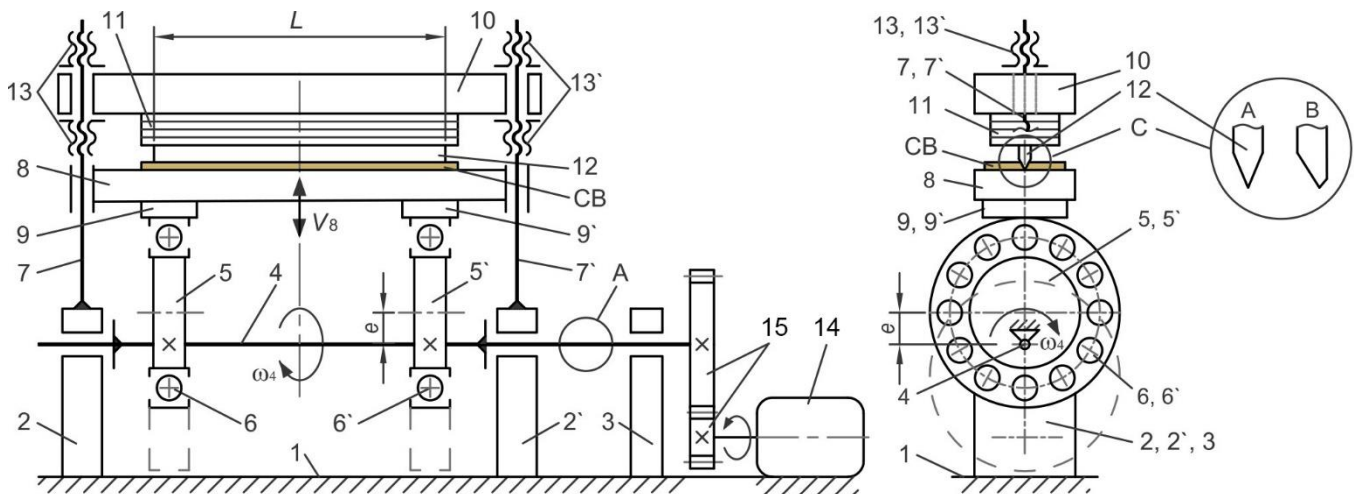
Scheme of the experimental device for determining torque values on drive shaft during cardboard cutting in die-cutting press with eccentric mechanism drive of the movable pressure plate: 1 – entablement; 2, 2' – supports; 3 – support; 4 – drive shaft; 5, 5' – eccentrics; 6, 6' – rolling bearings; 7, 7' – guides; 8 – movable pressure plate; 9, 9' – hasps; 10 – base plate; 11 – die-cutting forme; 12 – cutting rule (knife); 13, 13' – threaded joints; 14 – stepper motor; 15 – gear transmission; A - area on the drive shaft, strain gauges are placed
